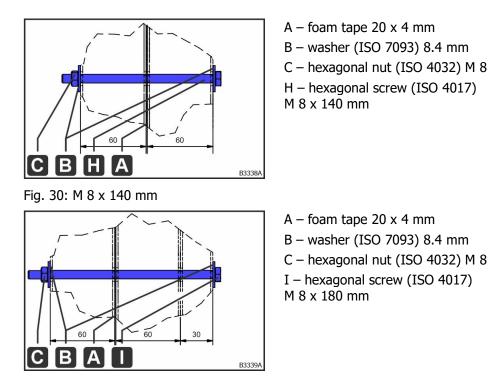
M 8 x 180 mm Work steps see chapter "Casing connection with through screw and nut", page 36.
